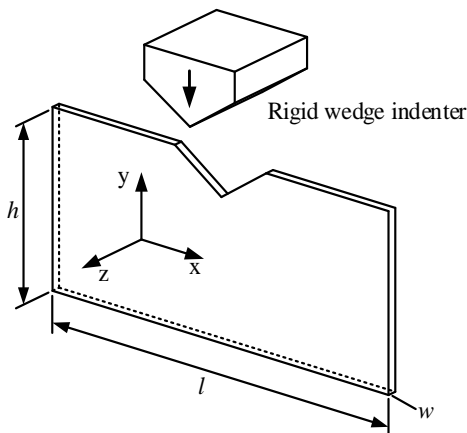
Single-layer model consisting of the deformable specimen and the rigid 90° wedge indenter
